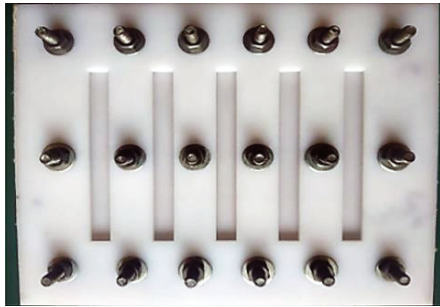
5-mm-thick fatigue specimens moulded using an HSM20 machine [16].
